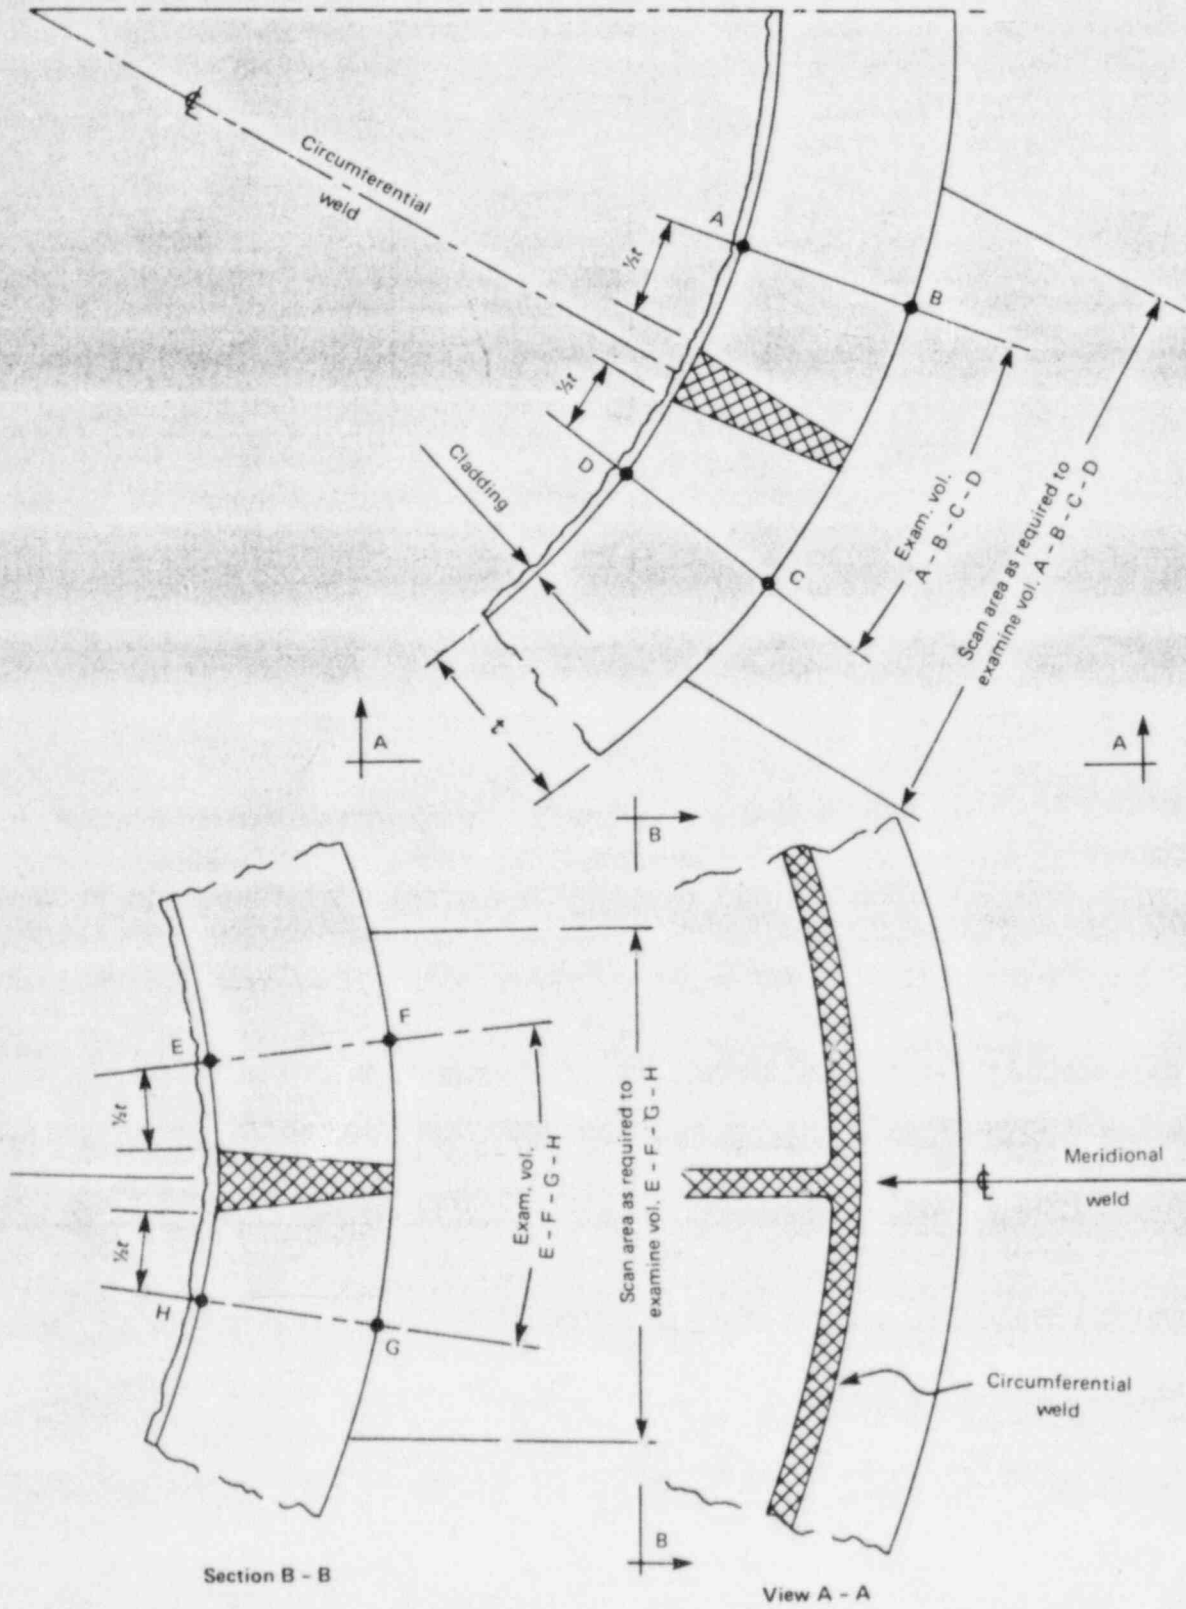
SPHERICAL VESSEL HEAD CIRCUMFERENTIAL AND MERIDIONAL WELD JOINTS
